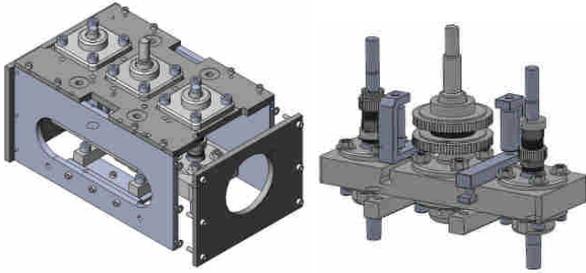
Transmission unit: (a) Transmission box, and (b) The layout of spindle unit.
